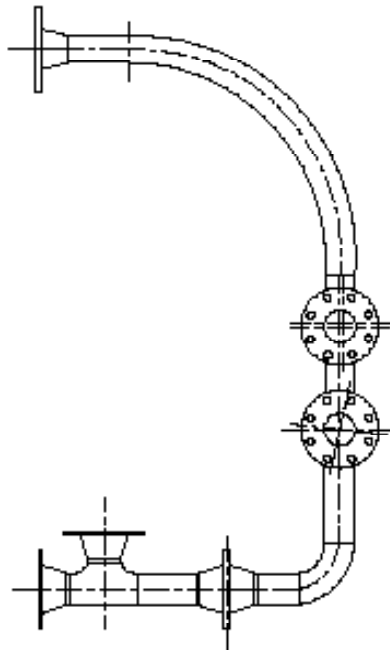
Dimensional and alignment checks for piping assembly
